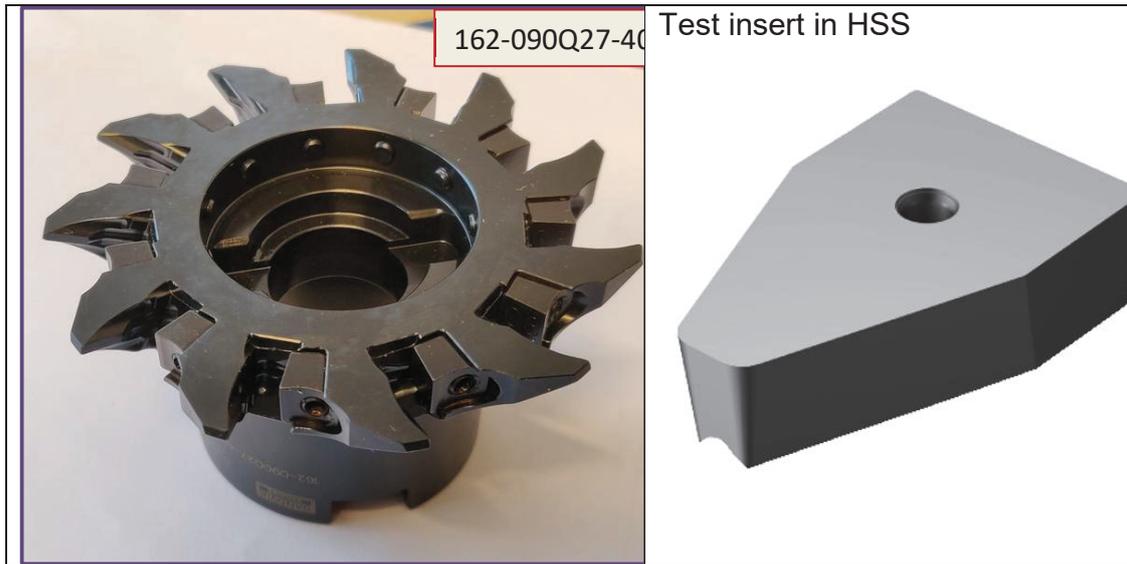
Sandvik Coromant tool holder for axial slot milling and custom made HSS test insert.
